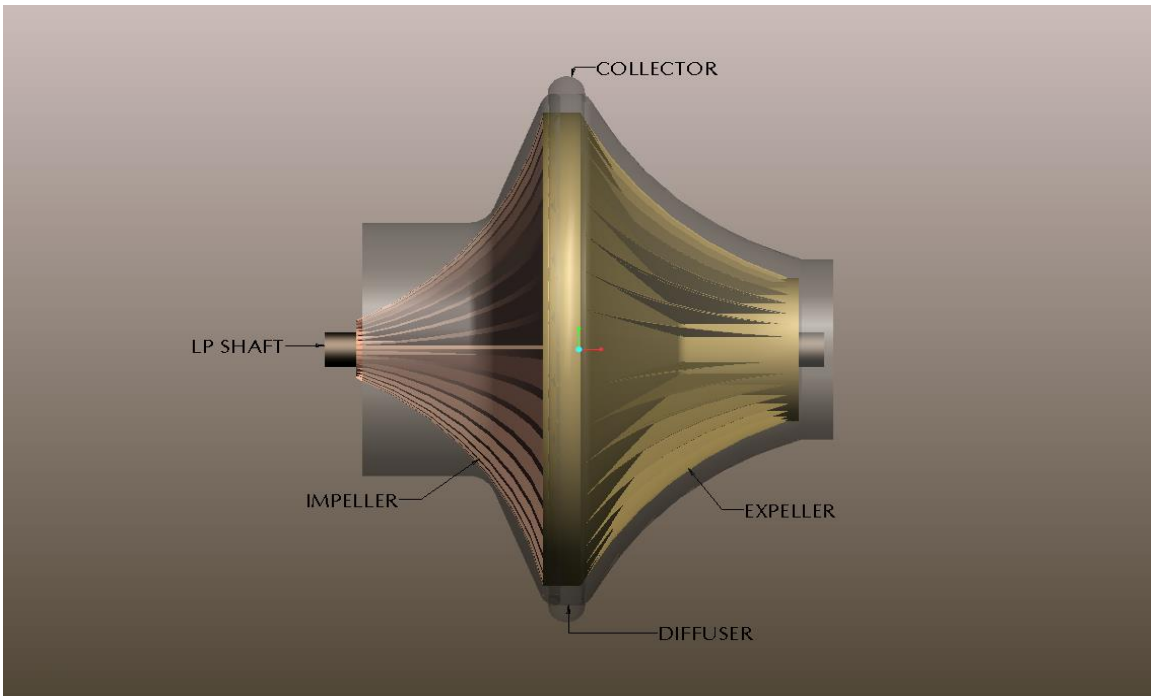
Rotating Impeller and Expeller in a Static Shell- -Side View
